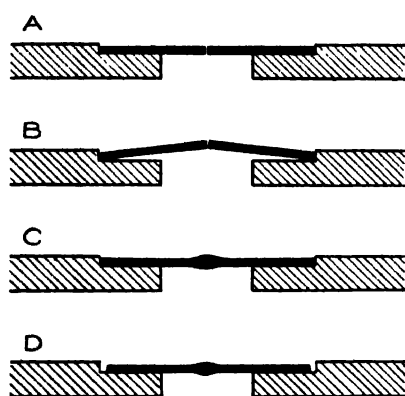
Illustrating the fundamental causes of distortion during and after welding.
